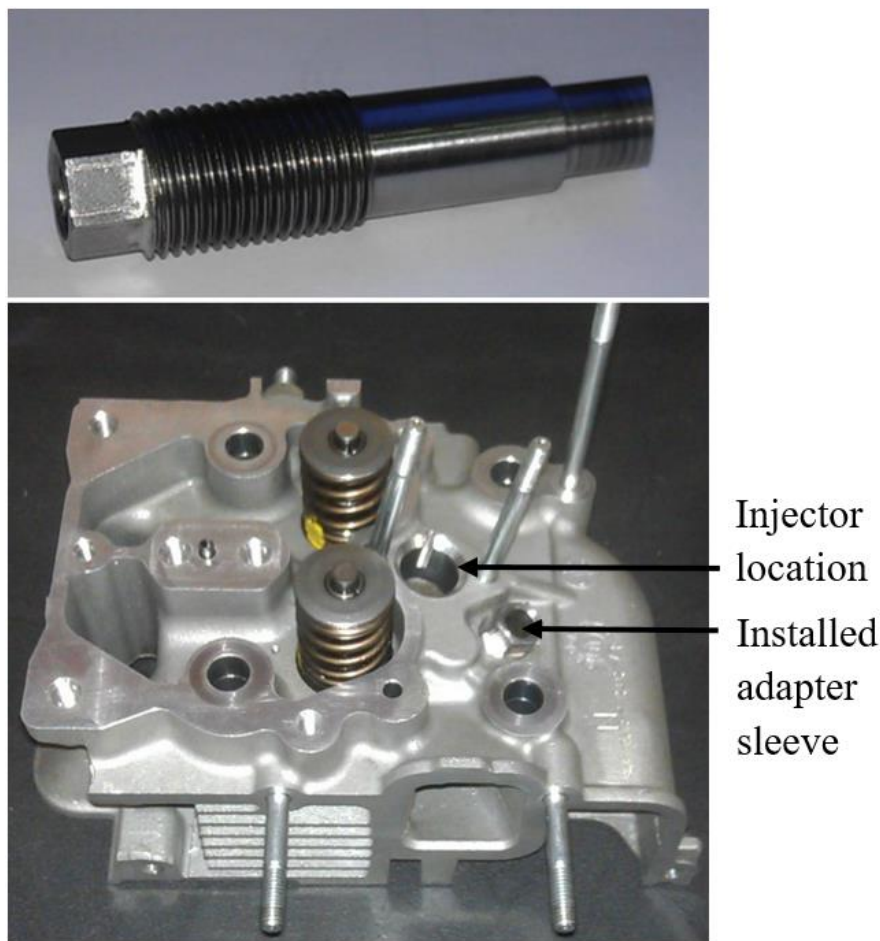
Adapter sleeve (top) and engine cylinder head (bottom)
